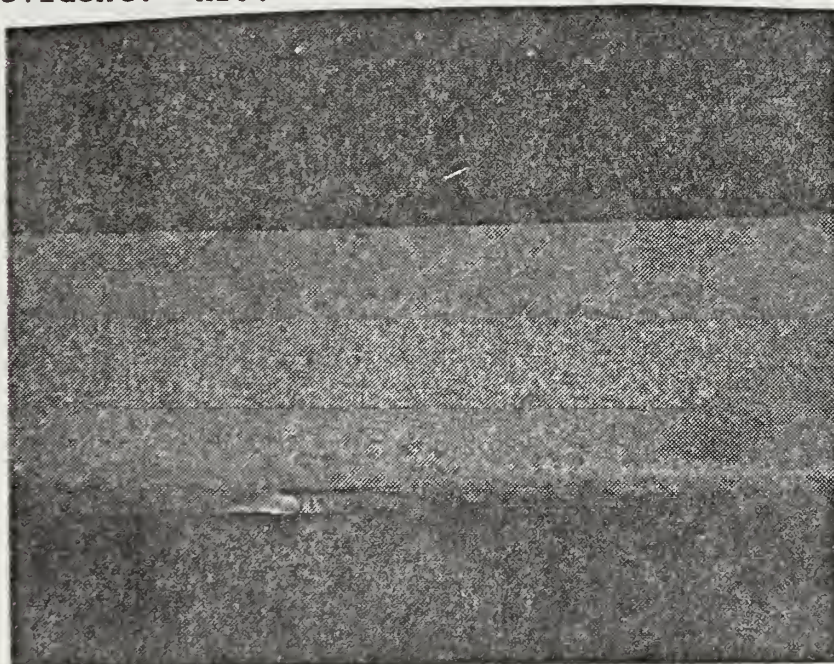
Macro-fractograph of specimen RQ-0-2, which was fractured after 87,800 cycles at 65 ksi, showing flat and fine fracture surface without any fatigue zone or fibrous zone. It appears very brittle. X10.
